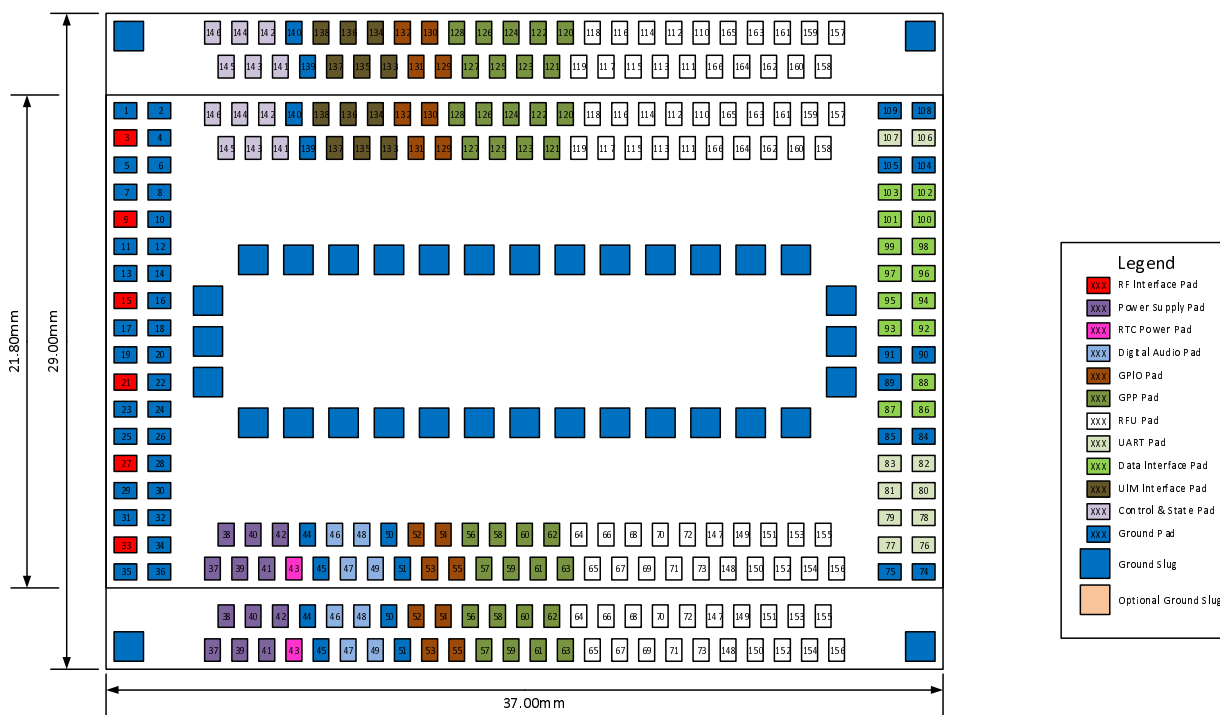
SMT3729 and SMT3722 Common PCB Pad Layout
